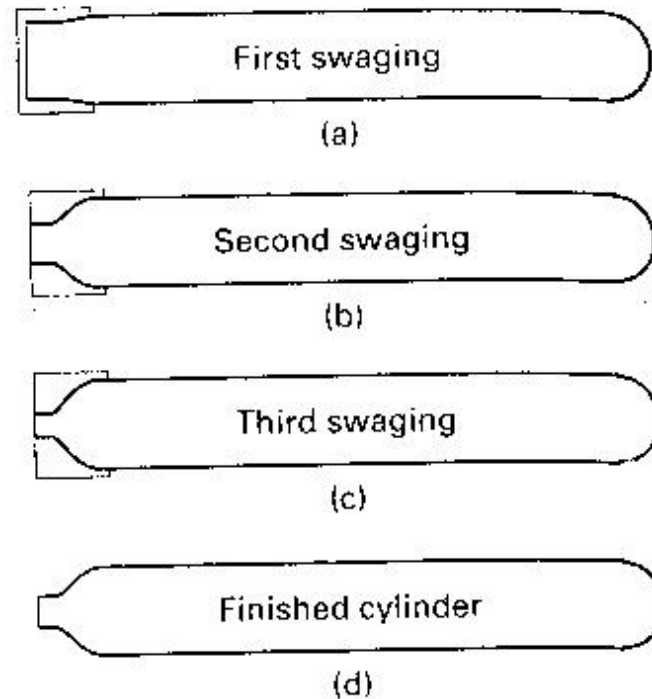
Steps in swaging a tube to form the neck of a gas cylinder.
